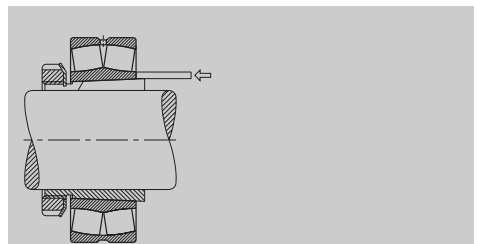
Dismounting of Adapter Sleeve by using Metal Drift
